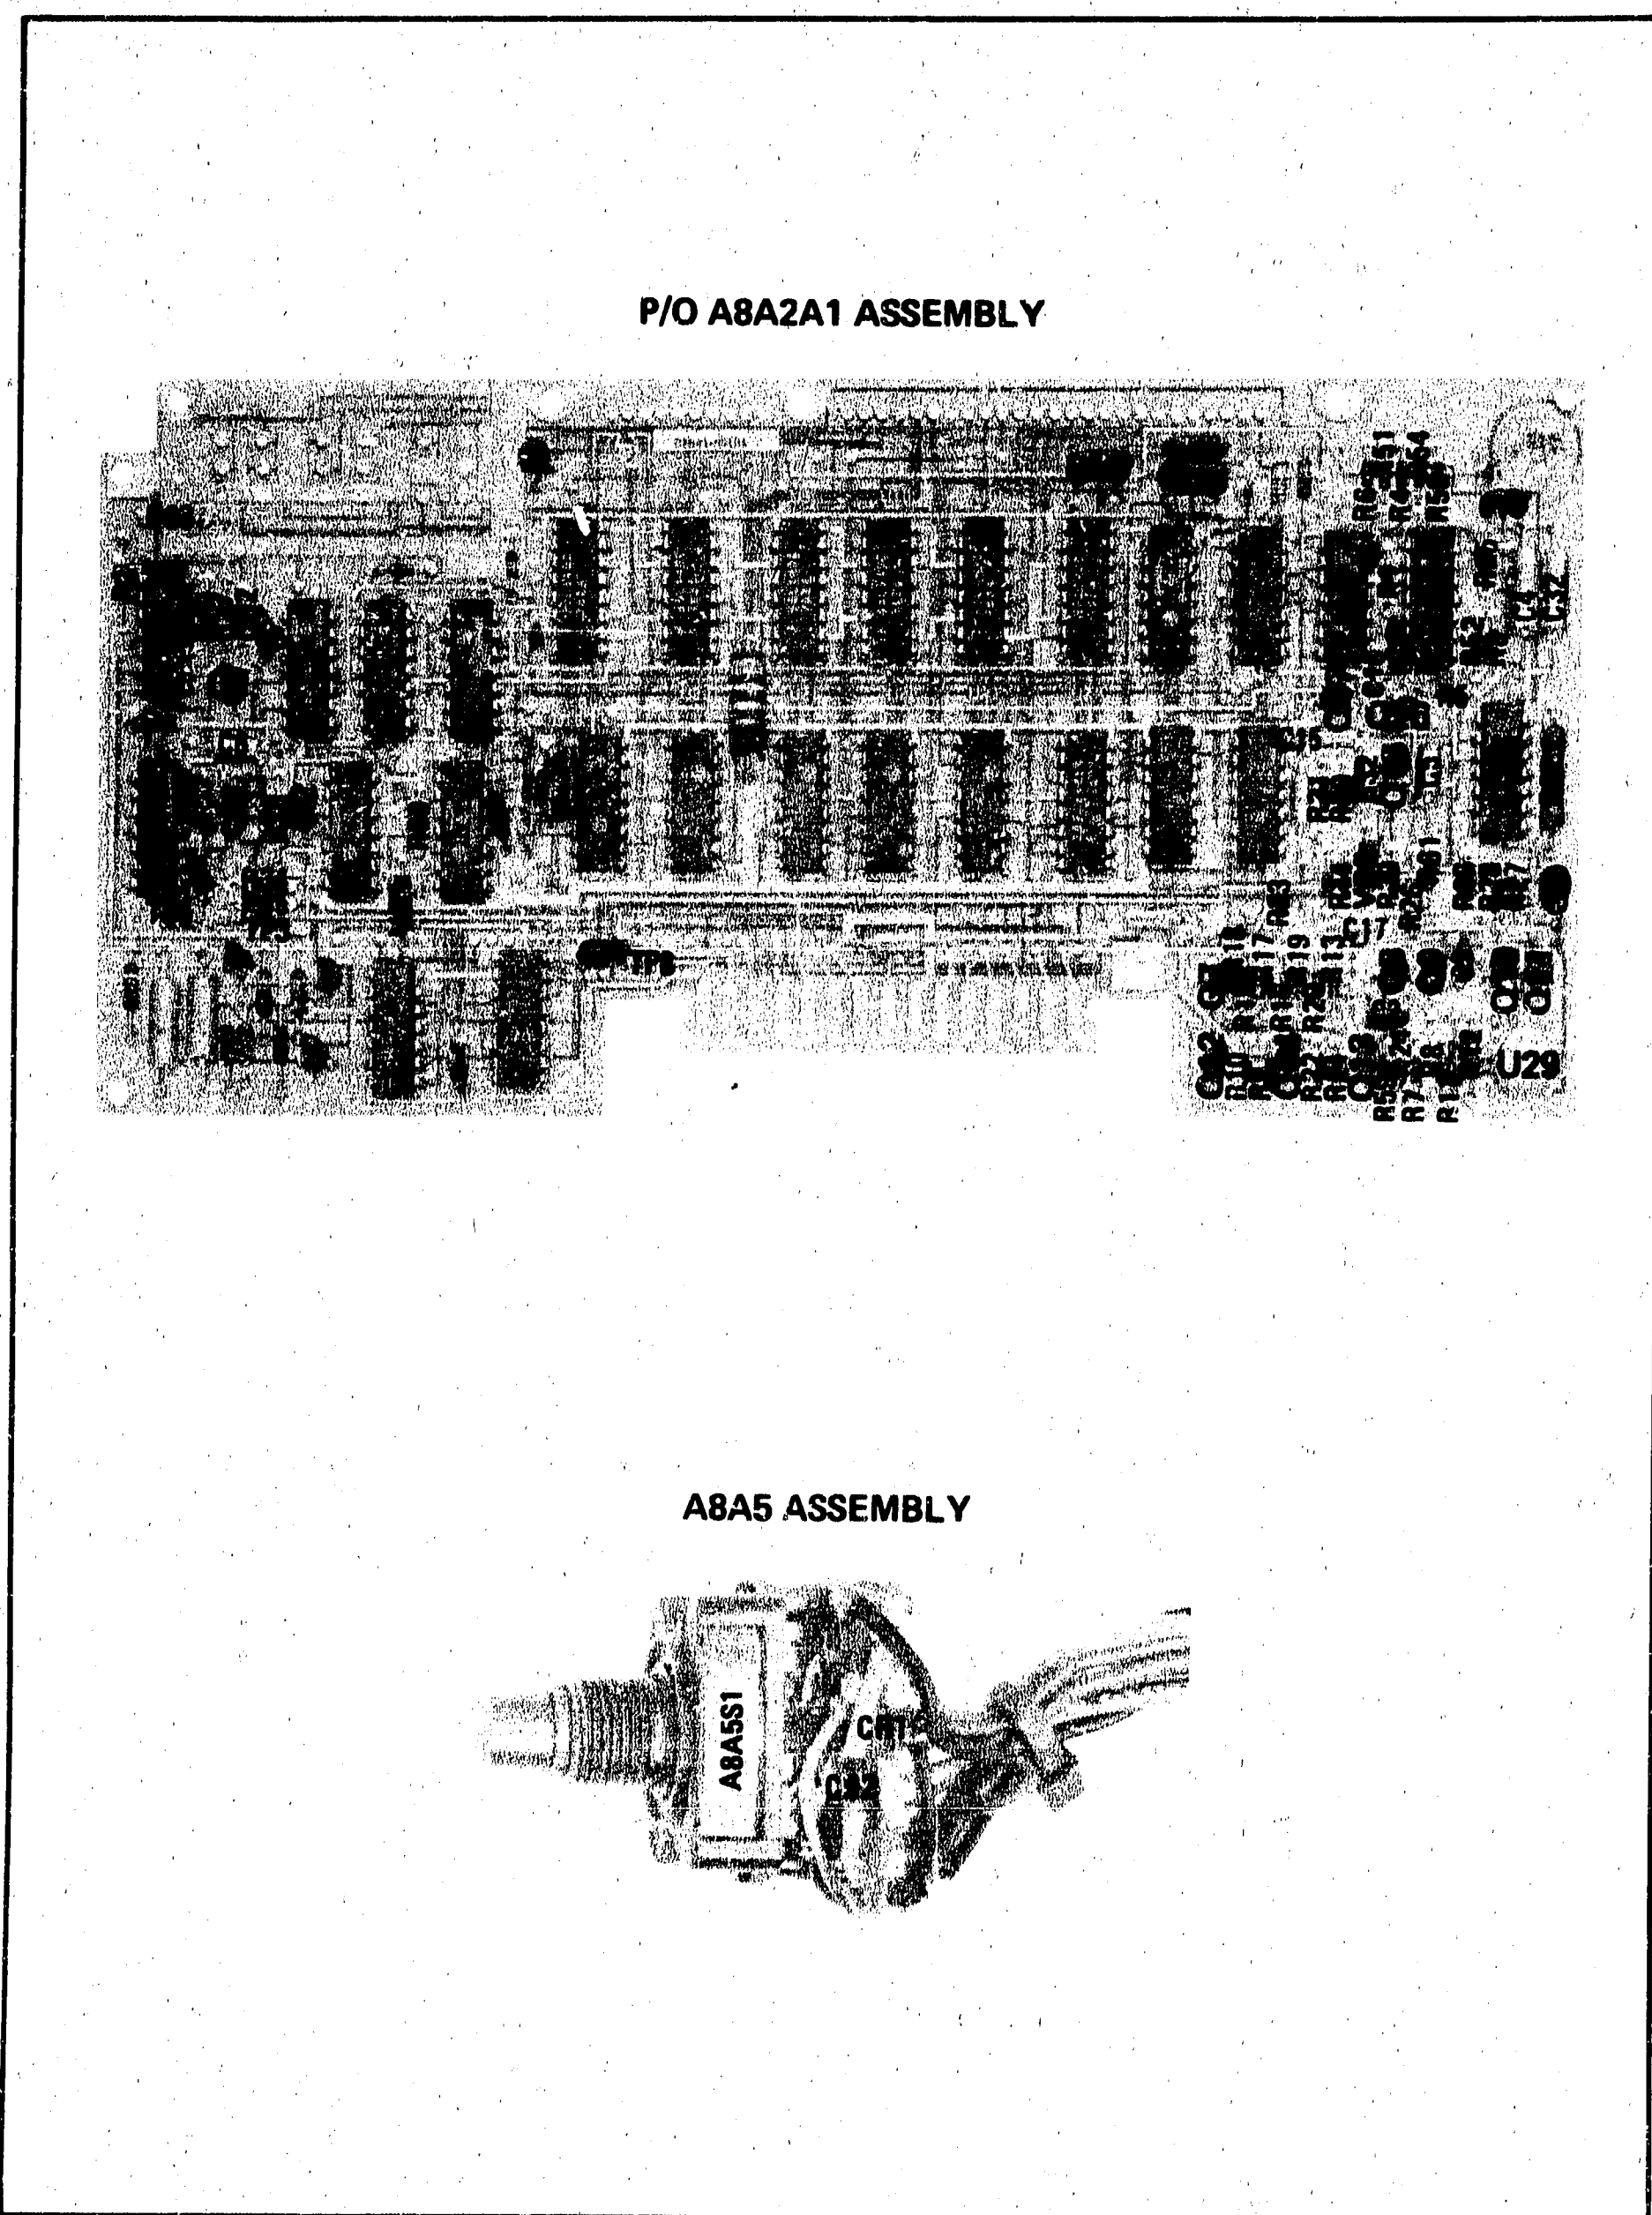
P/O ABA2A1 Counter/Lock Board Assembly and ABA5 Counter Switch Component Locations
